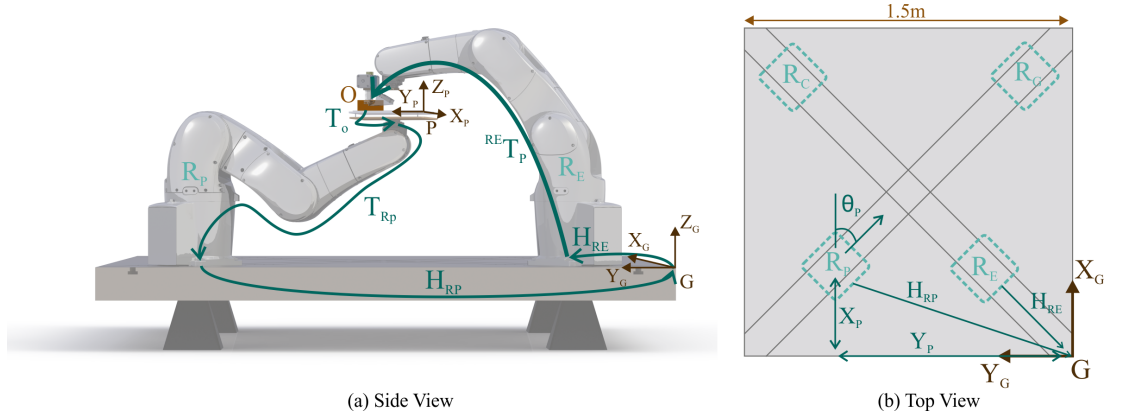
(a) Side view of system showing the Build Plate, R_P , and Extruder, R_E , Robots, the printed object, O , and the build plate origin, P . The global origin, G , is at the bottom right corner. The transformation used in the kinematic model are also denoted. The Camera, R_C , and Gripper, R_G , robots are removed from this view for clarity. (b) Top down view of the system, four robot arms are located in T-slots which cross the diagonals of a steel base plate.
